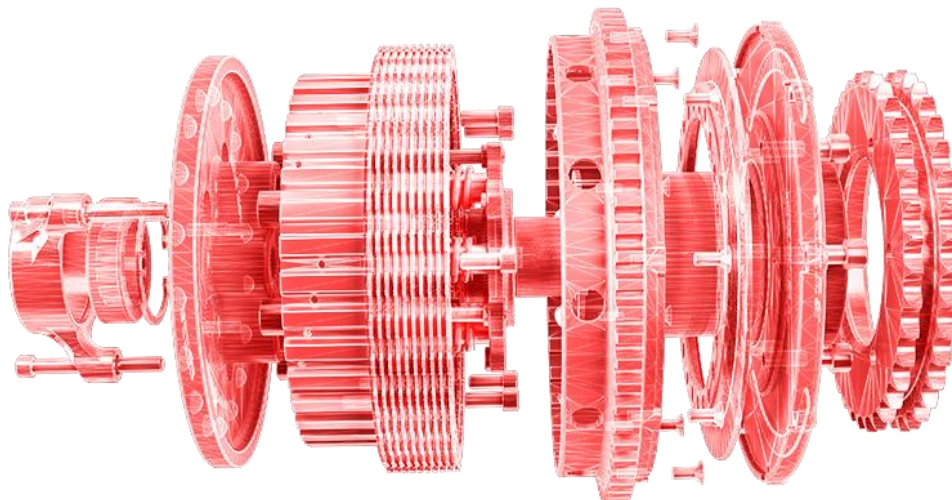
OnePart* is capable of recognizing very detailed and complex parts and assemblies.
